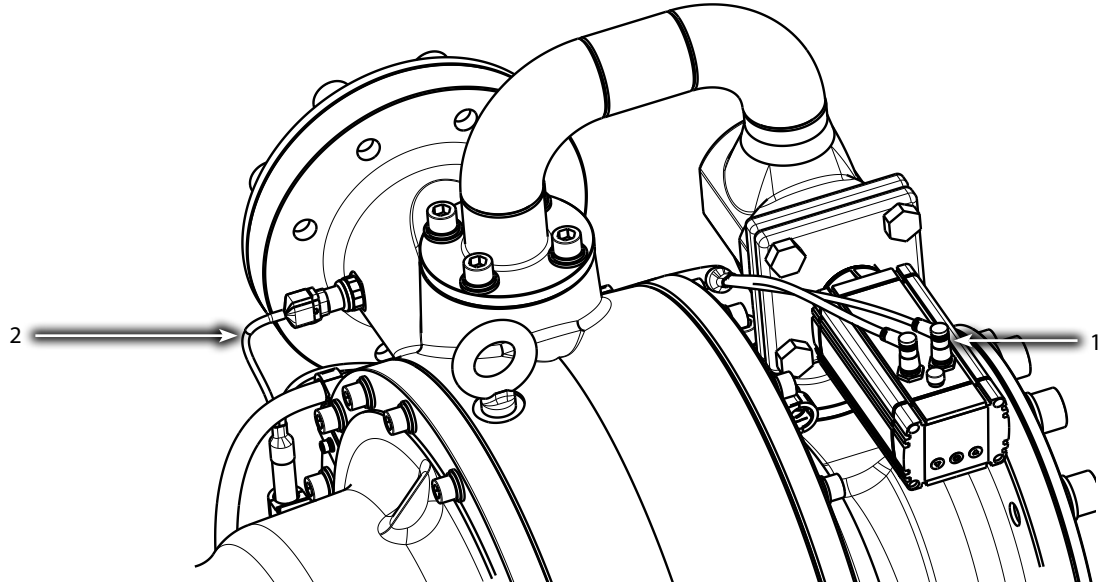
Compressor Sensors and Cables Topside - VTT
